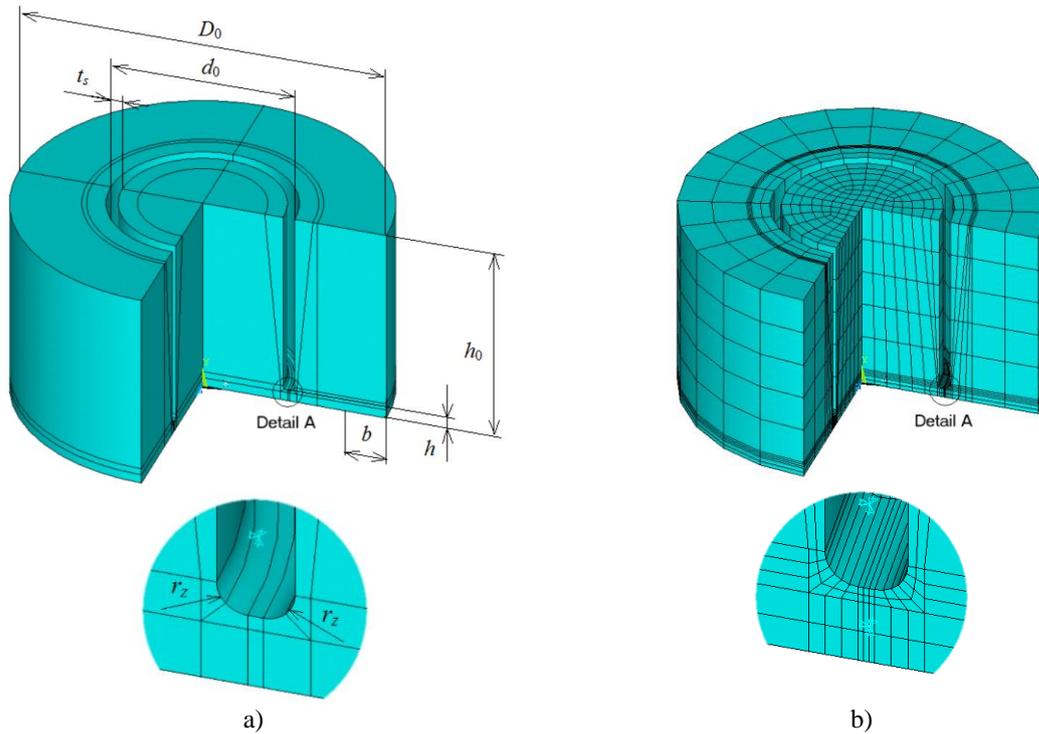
Geometrical model (a) and finite element model (b) of the workpiece with the details from the region of the hole bottom
